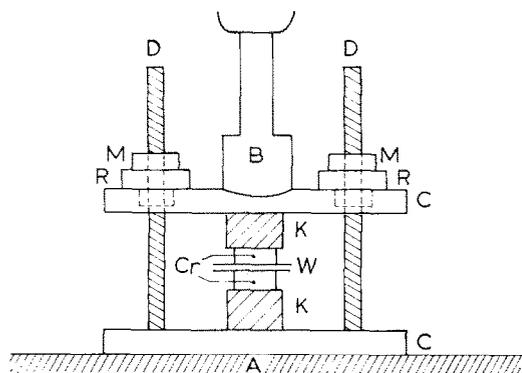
Specimen holder for resistance welding the diffusion couples Cr-W-Cr.
